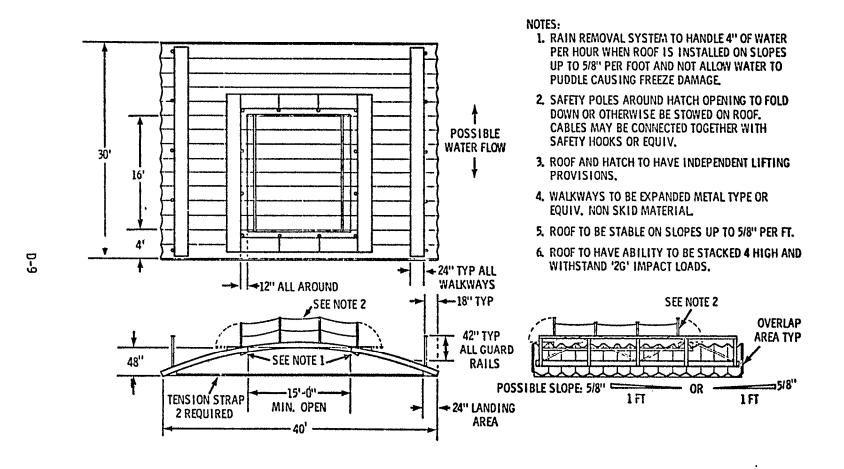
Design for a Portable, Trussless Cover with Hatch for Hull Construction - Newport News Shipbuilding and Dry Dock Company.
